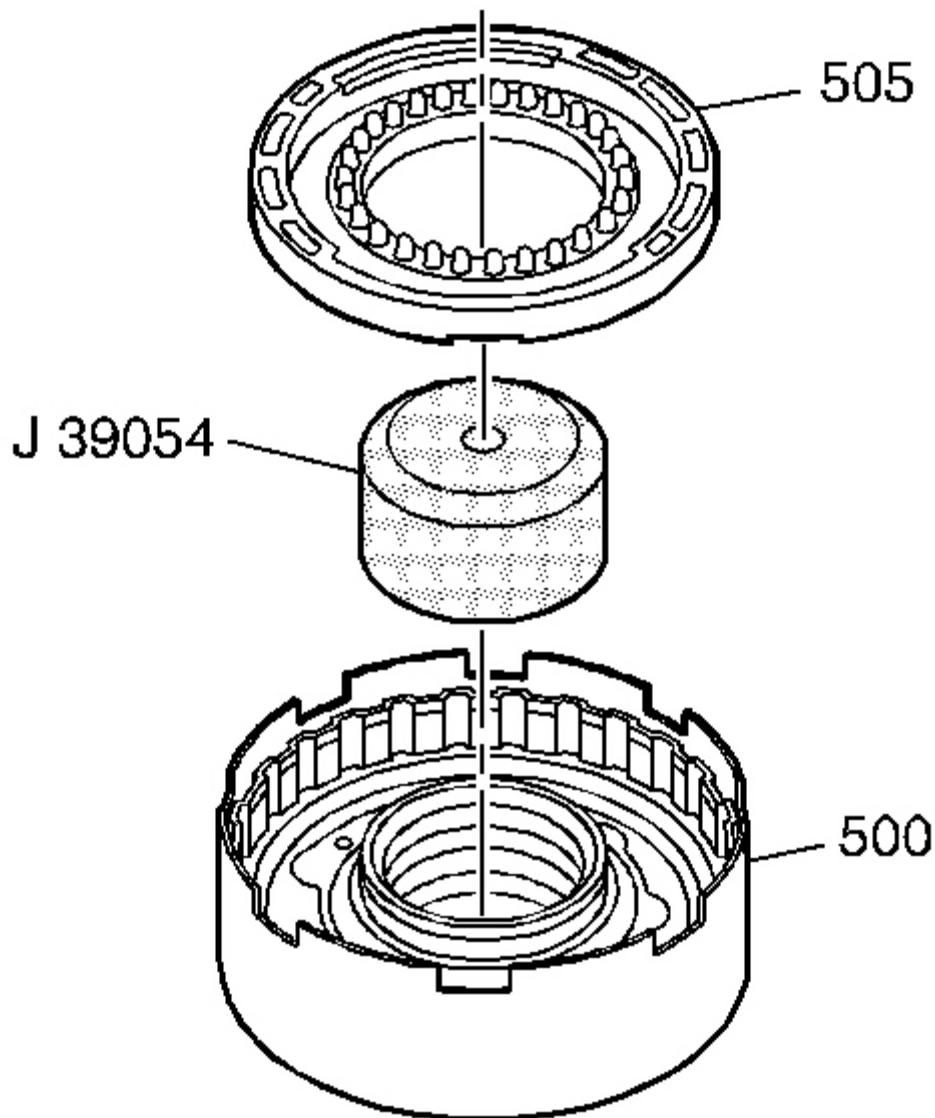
Installing The Reverse Clutch Piston (505) Into The Reverse Clutch Housing Using J 39054
